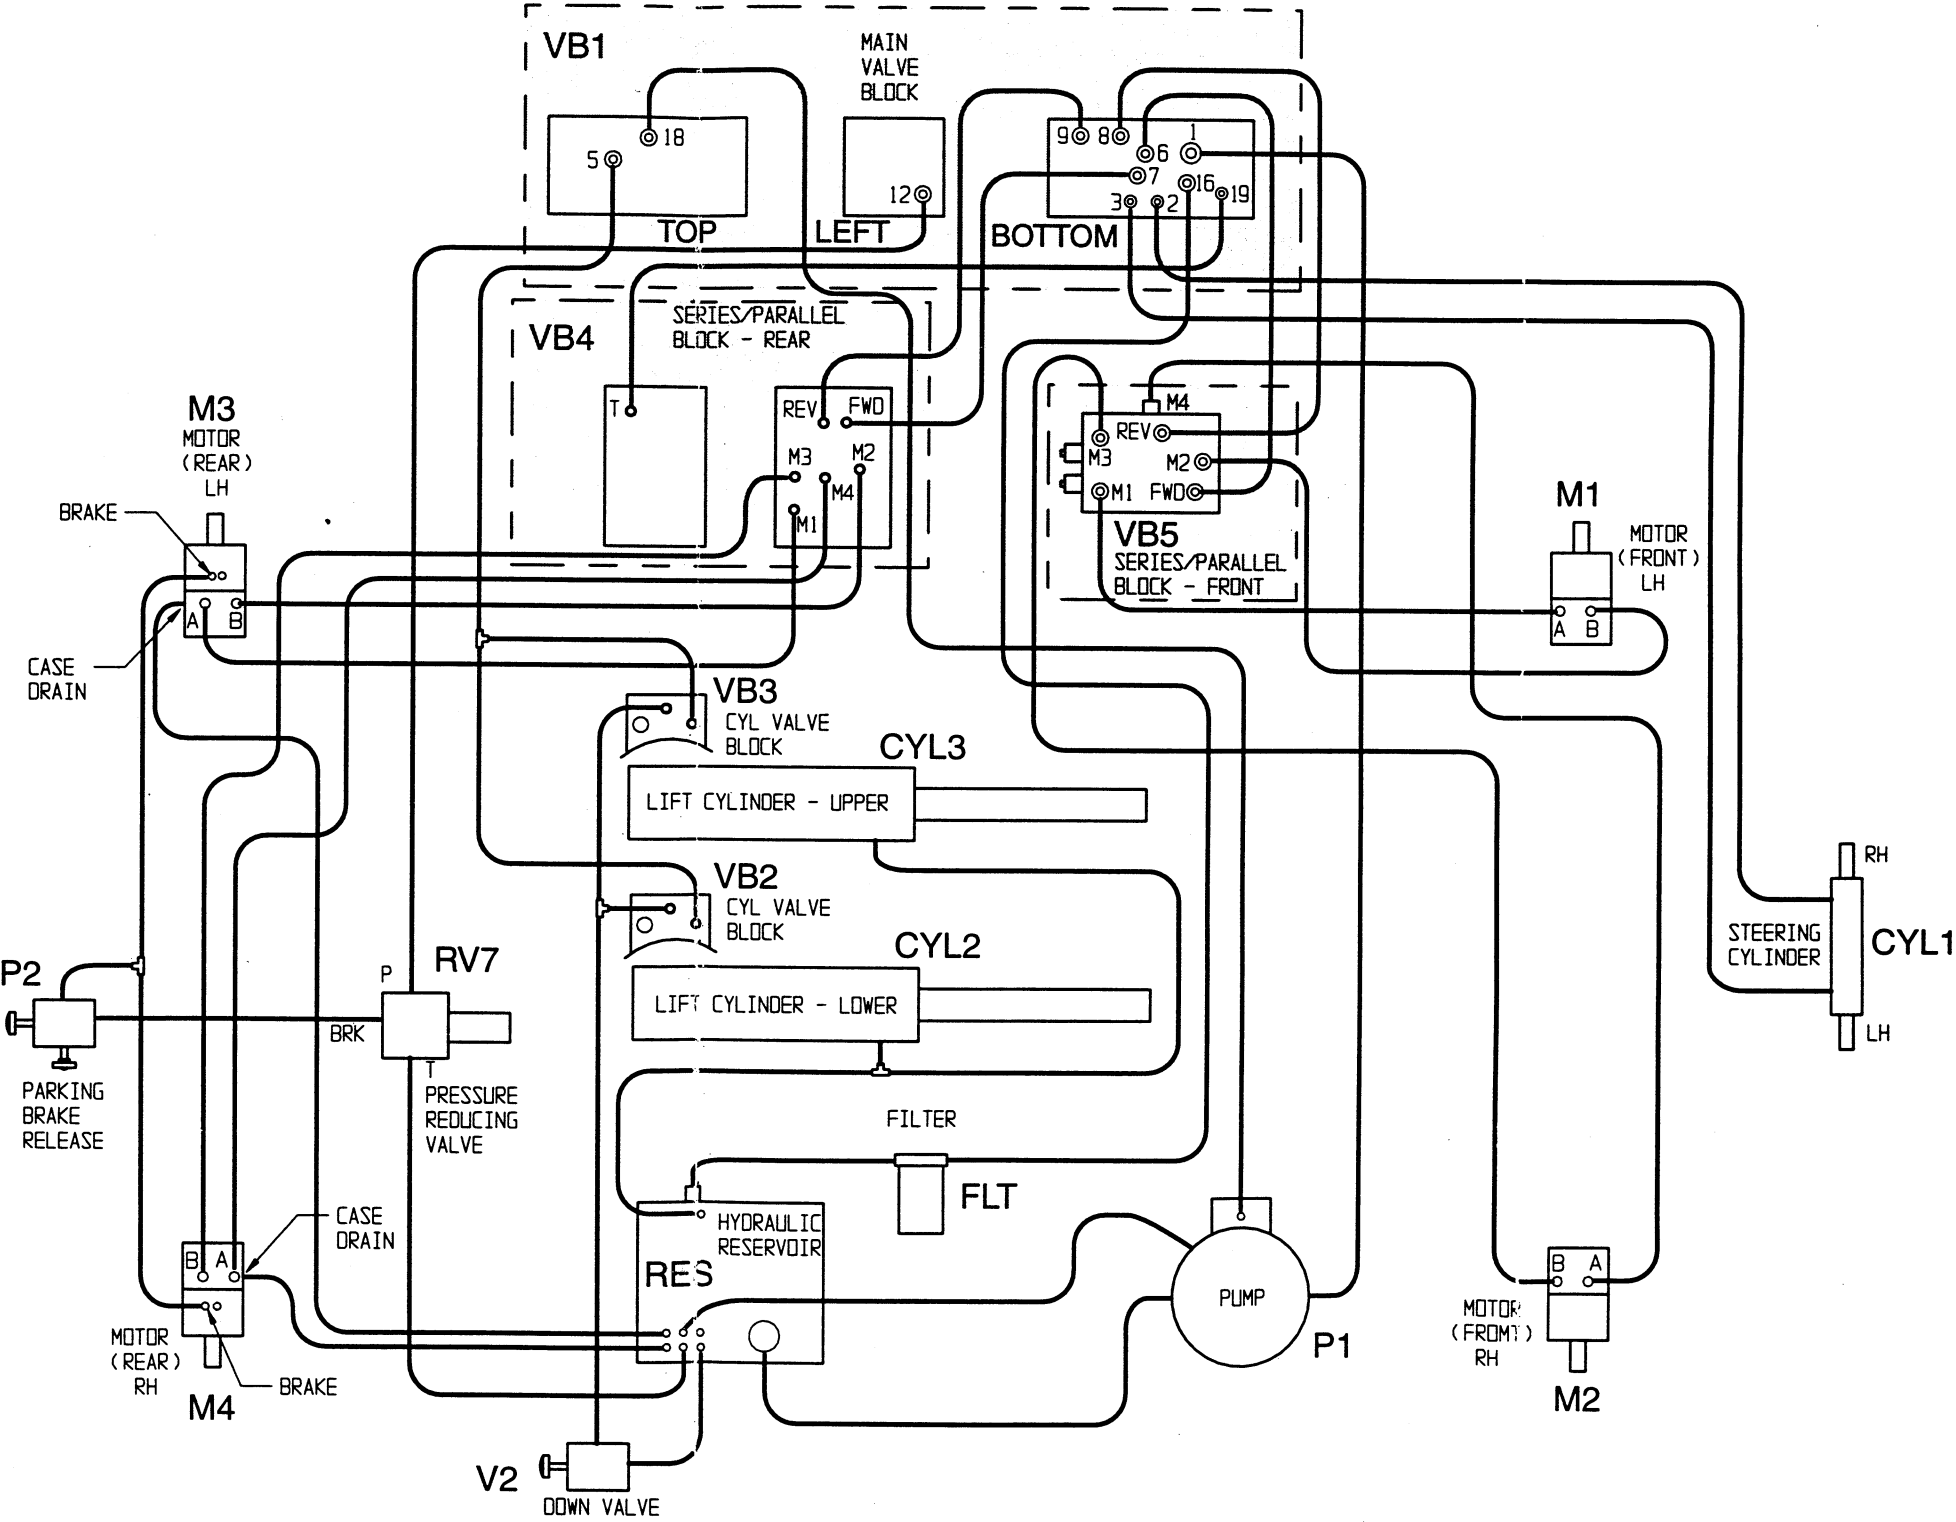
Hose Routing, XRT33 4-Wheel Drive
